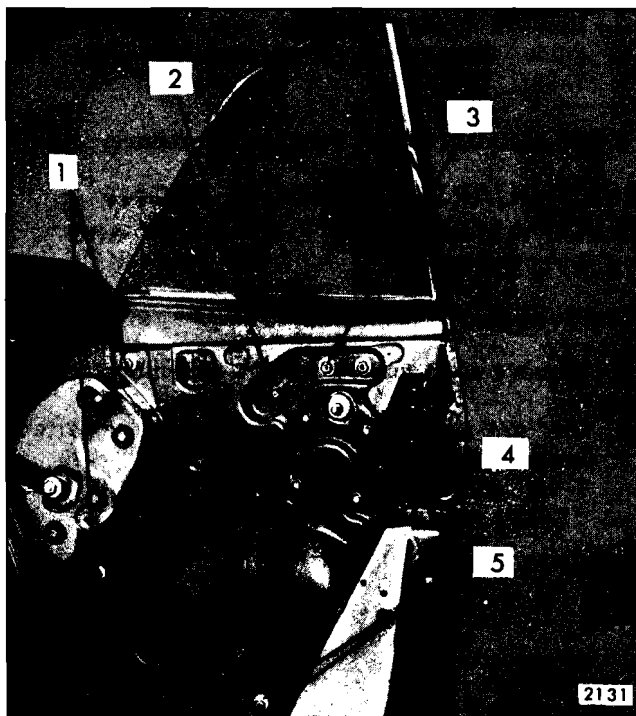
Rear Quarter Hardware - "Z-67" Styles
